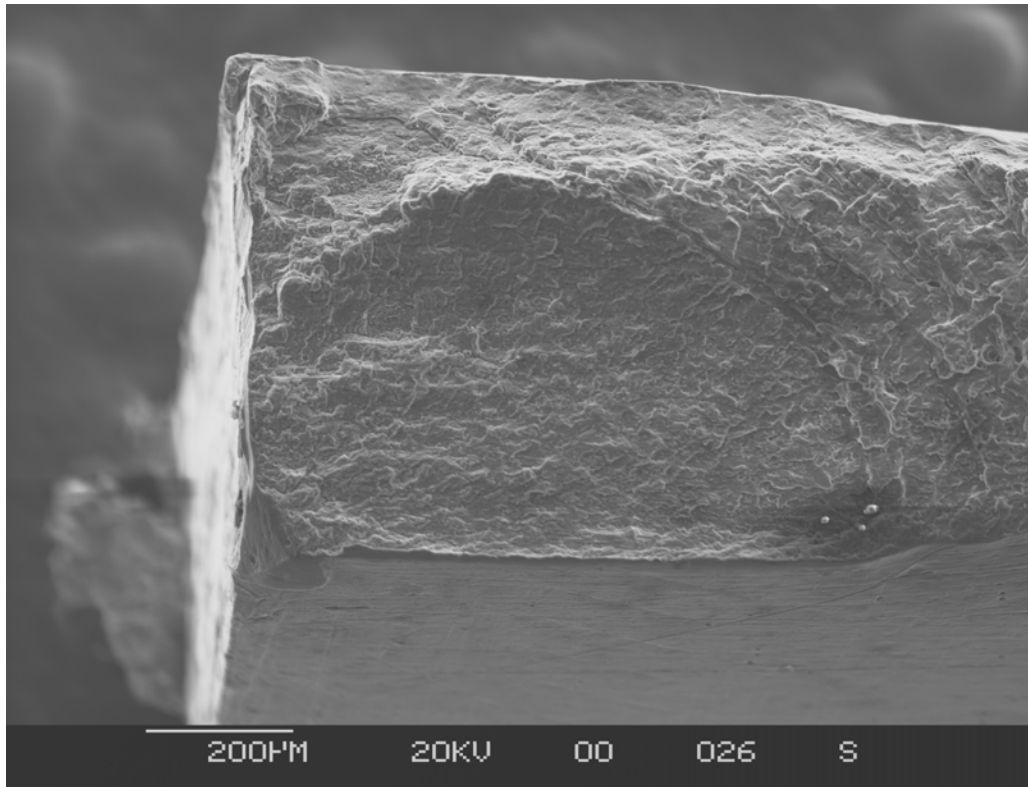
Fatigue Crack on Fracture Surface of Specimen 5772.
